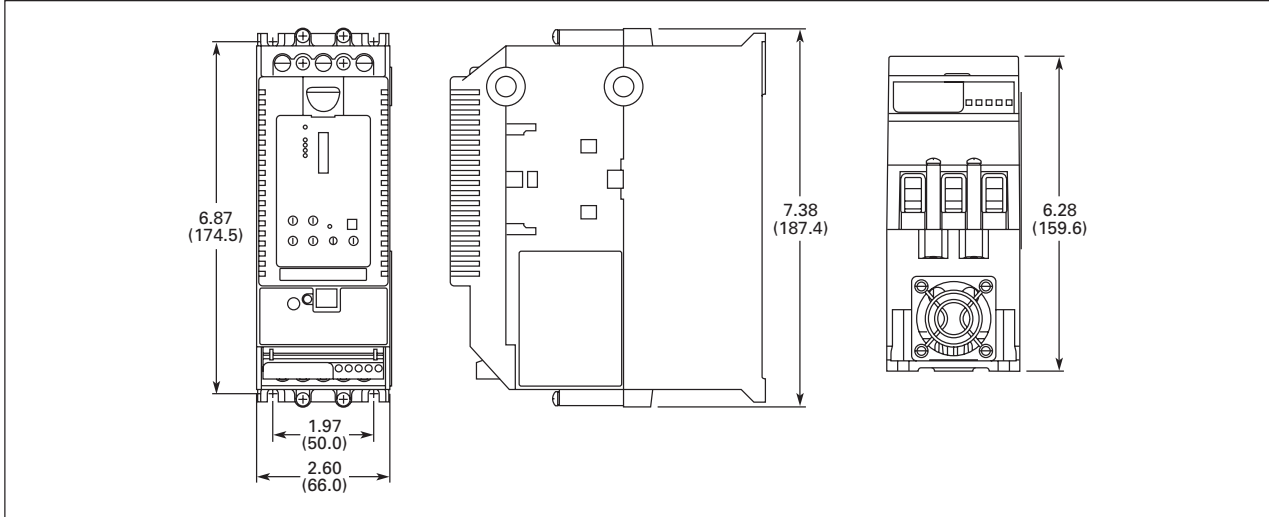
N-Frame (65 mm) S801 Approximate Dimensions in Inches (mm)
